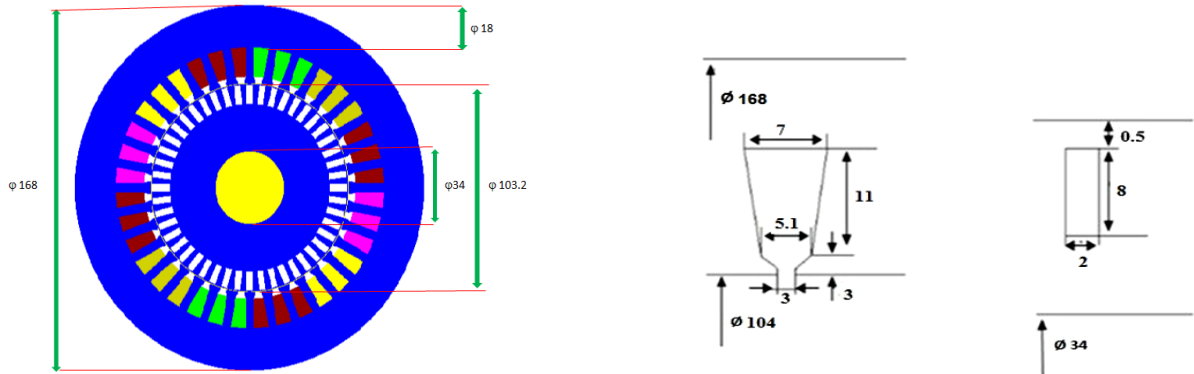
Optimizing motor geometrical dimensions en (mm)
